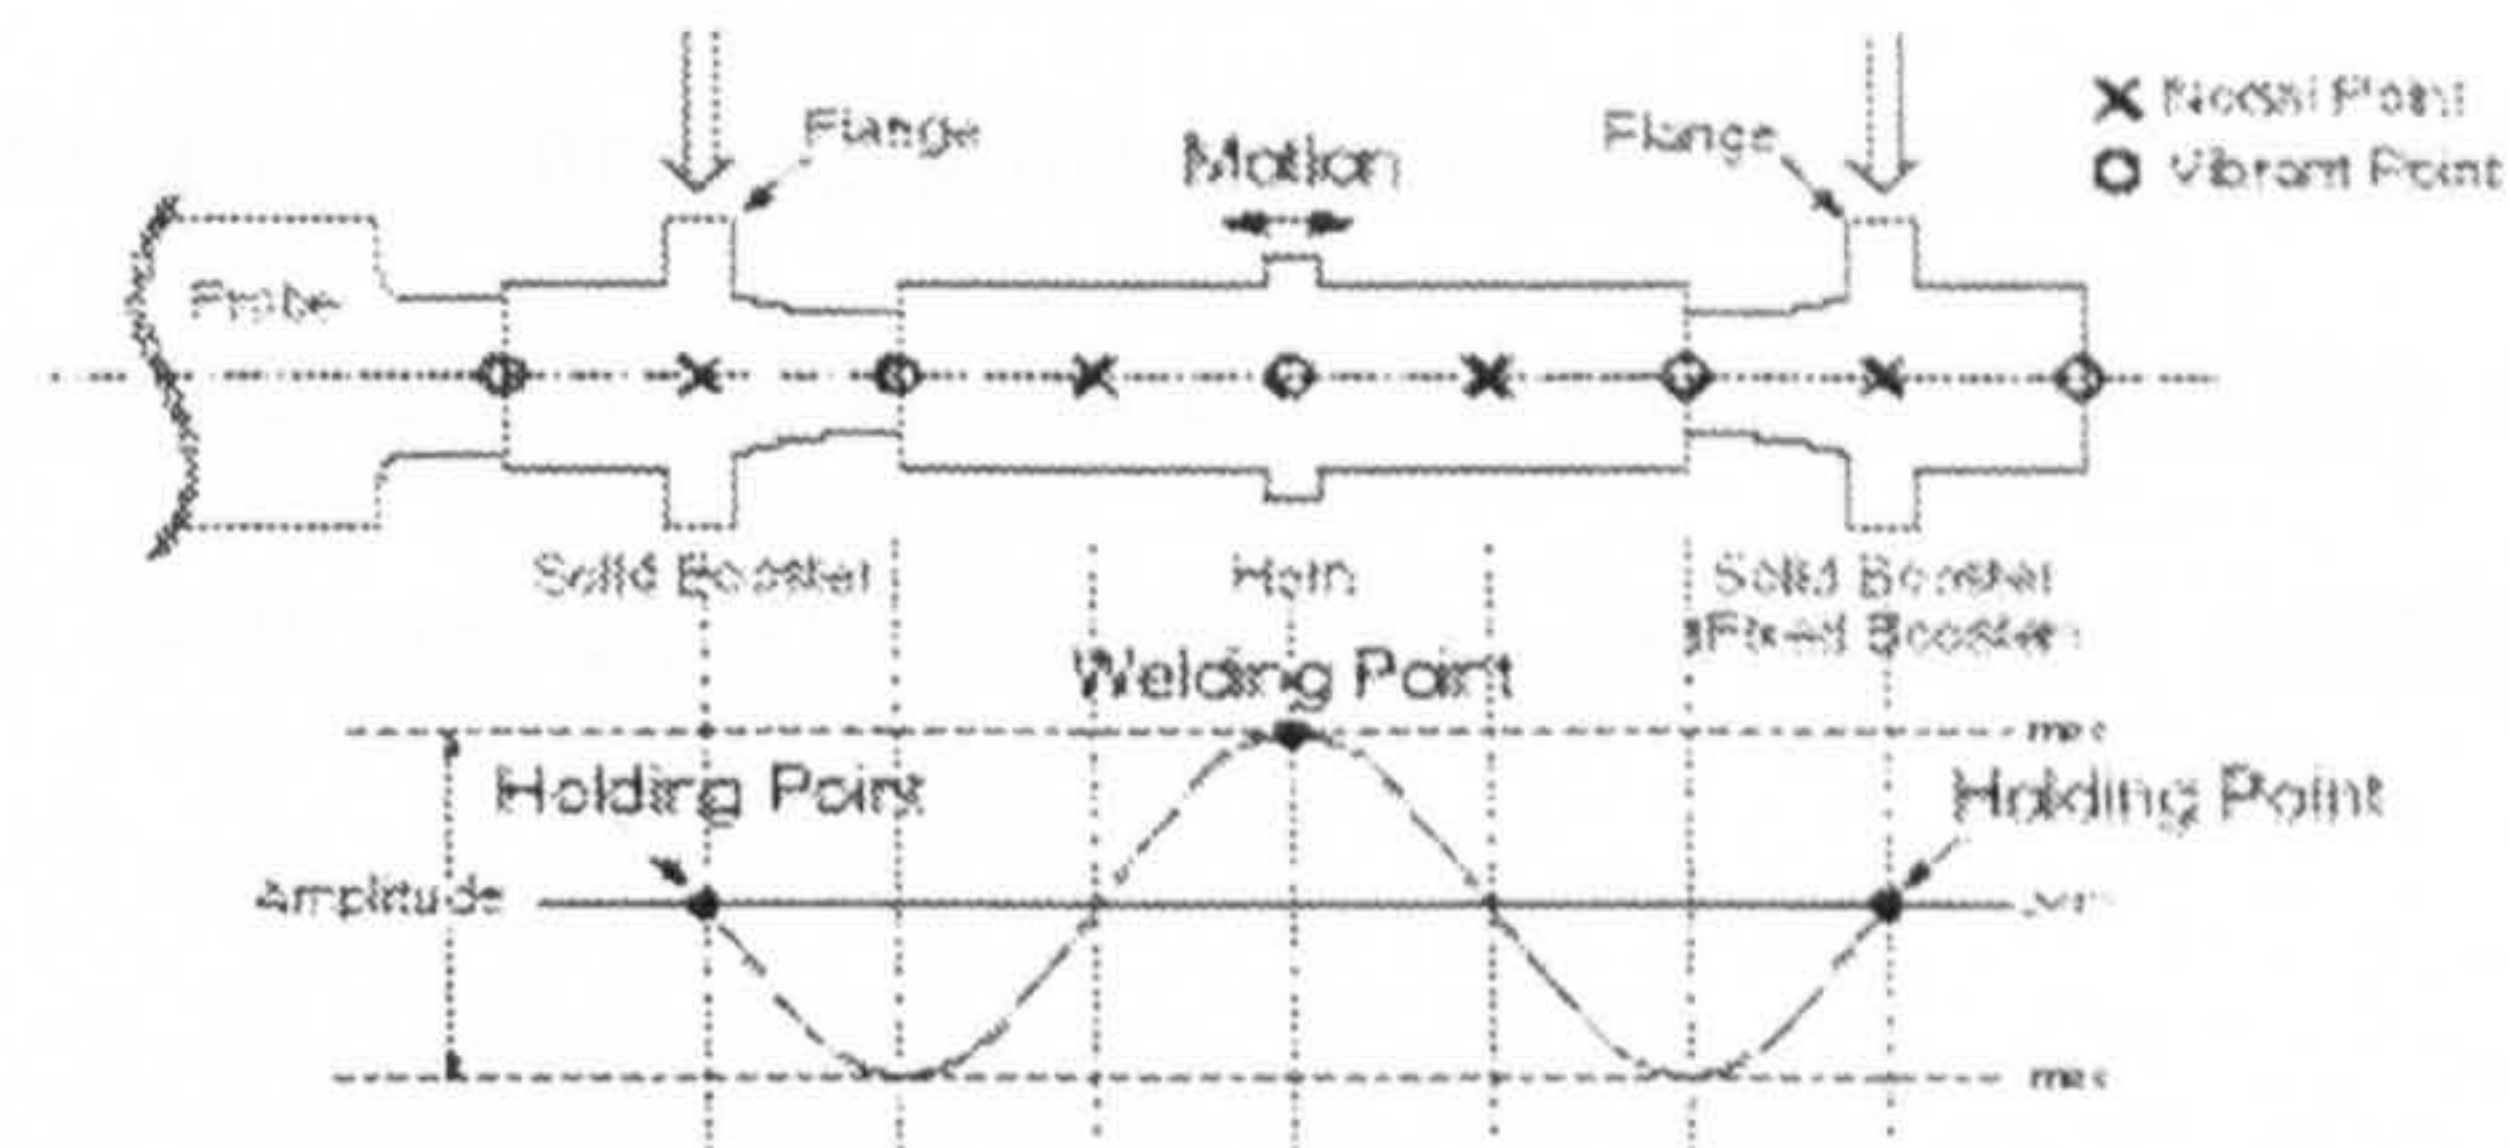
Procedure for ultrasonic metal welding [Dukane Corp., St. Charles, IL (USA)]
